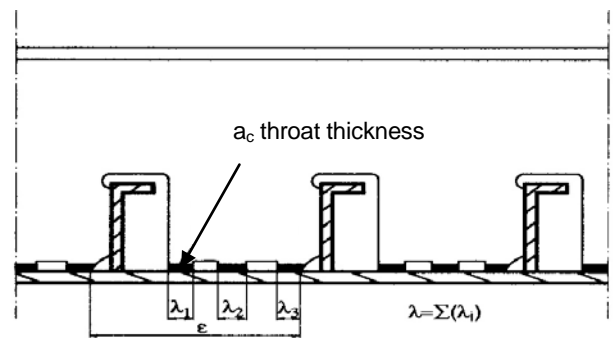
Intermittent scallop fillet welding between cut-outs
